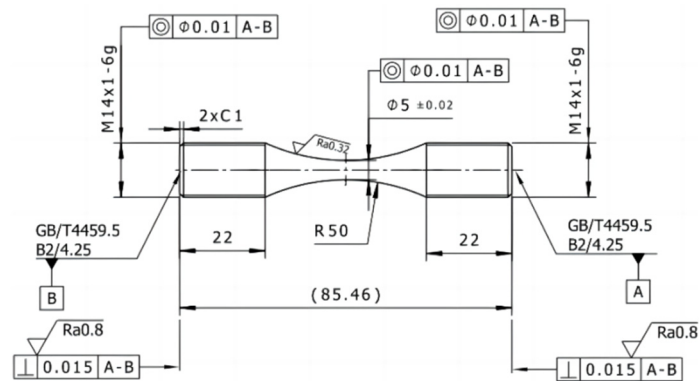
Technical drawing of the fatigue-testing specimen [19].
